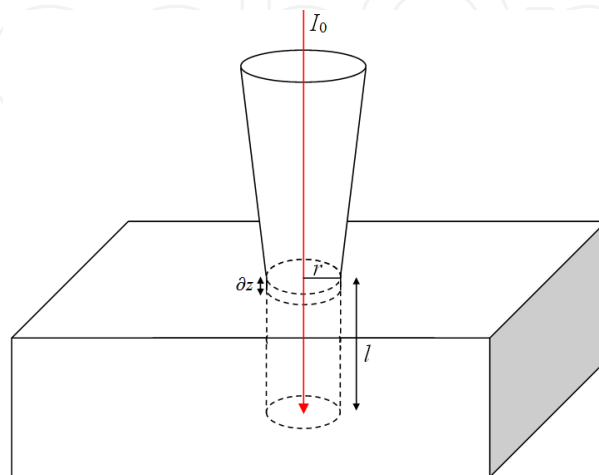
Illustration of the penetration depth of the focused laser beam on a welding specimen.
